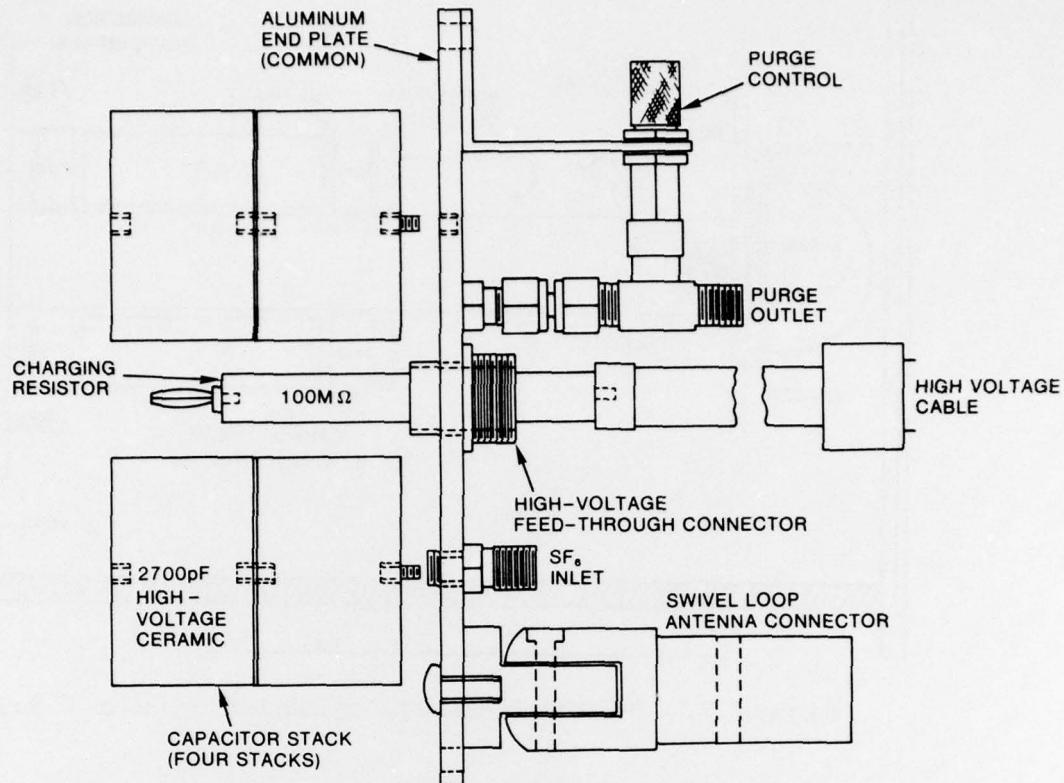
Pulser ground-plate assembly (scale 1.8:1).
